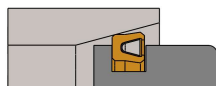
Remove stretch cone. Place resizing sleeve onto piston
